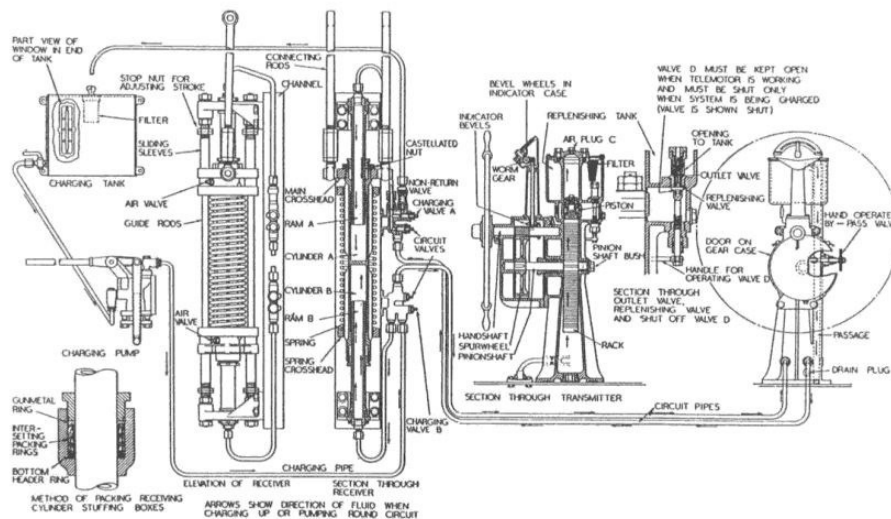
Patent hydraulic steering Telemotor (Brown Bros & Co Ltd)
